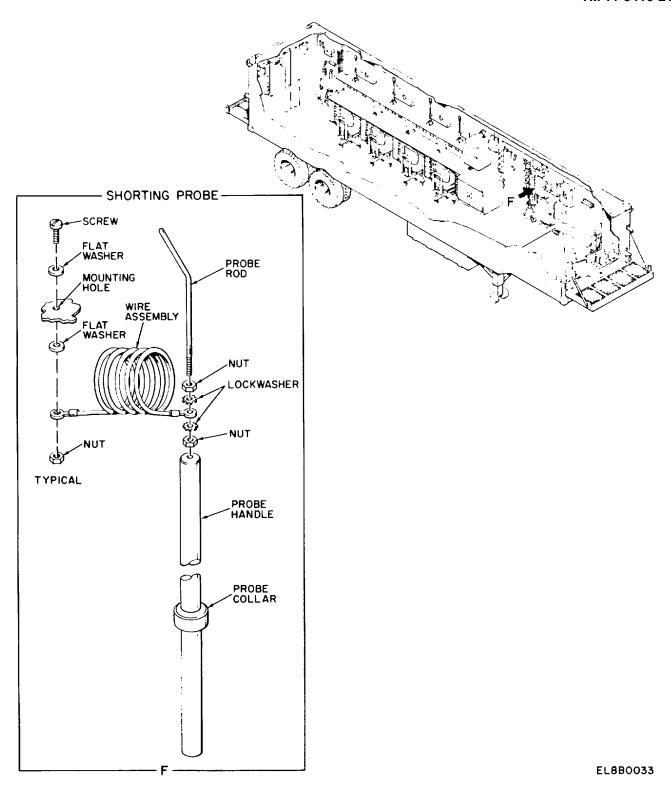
Removal and Installation of Direct Support and General Support Repair Facility Components/Assemblies (Sheet 4 of 4)
